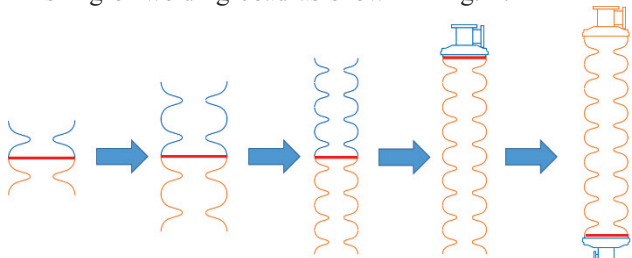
Explanation of previous equator welding process. Red lines represent welding position.
